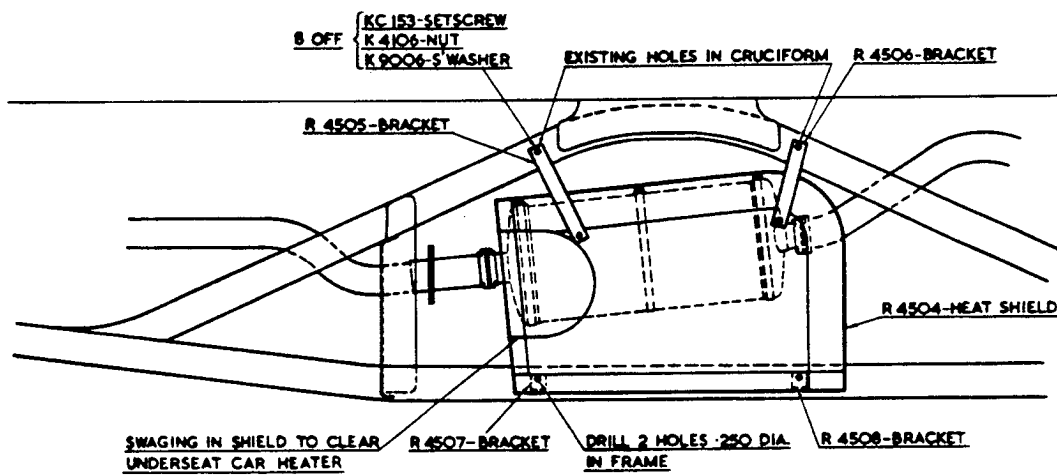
GENERAL ARRANGEMENT OF HEAT SHIELD IN POSITION.
